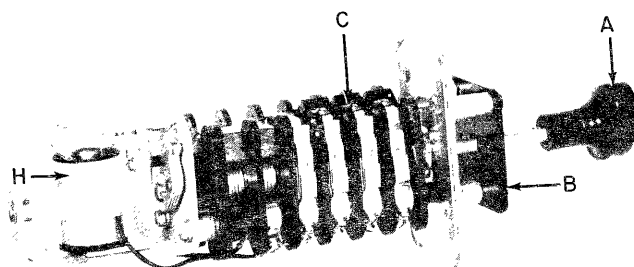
Type HEA61 Auxiliary relay, cover removed
